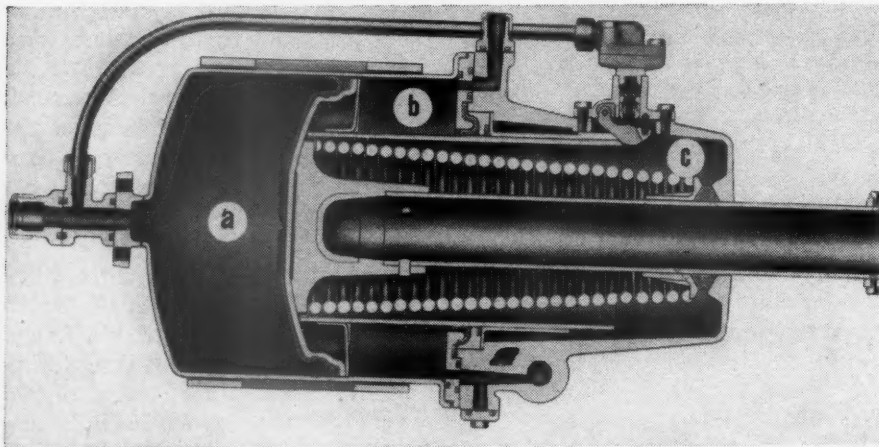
The brake-cylinder body showing the 12-in. piston chamber *a*; the chamber *b* around the hollow rod; and the chamber *c* inside the hollow rod
